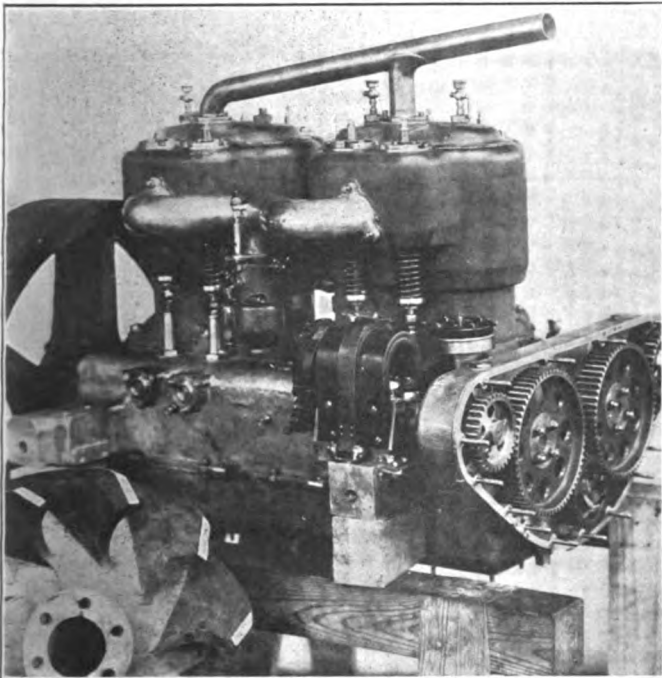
Orson motor with gear wheel case removed and showing part of flywheel
